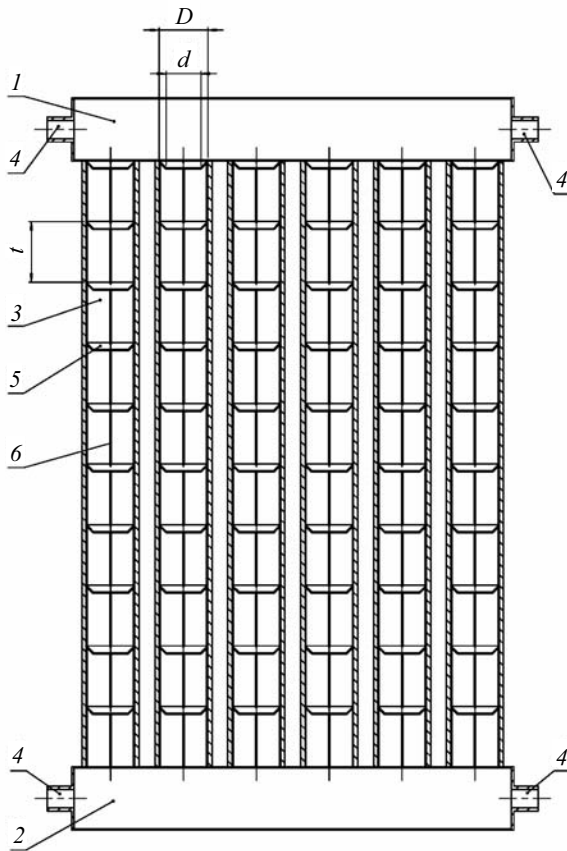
Drawing of a radiator with disc inserts: 1, 2 — collectors; 3 — section; 4 — coupling; 5 — insert; 6 — axis
